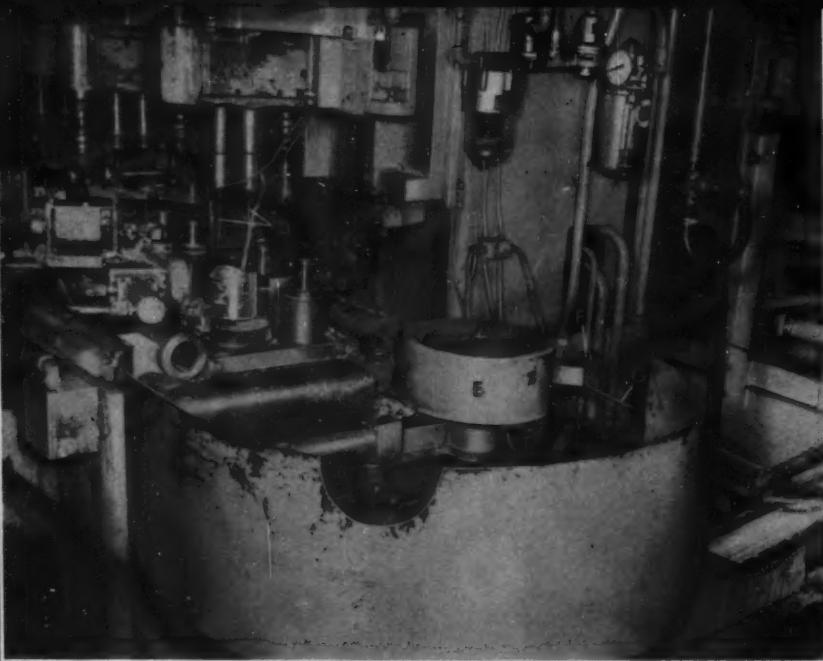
Probes (D) enter the oil holes at the ninth station to be sure that they have been drilled completely through the weight bosses. Unloading turret (E) transfers the pistons from the probing position to a chute (G) behind the machine.
